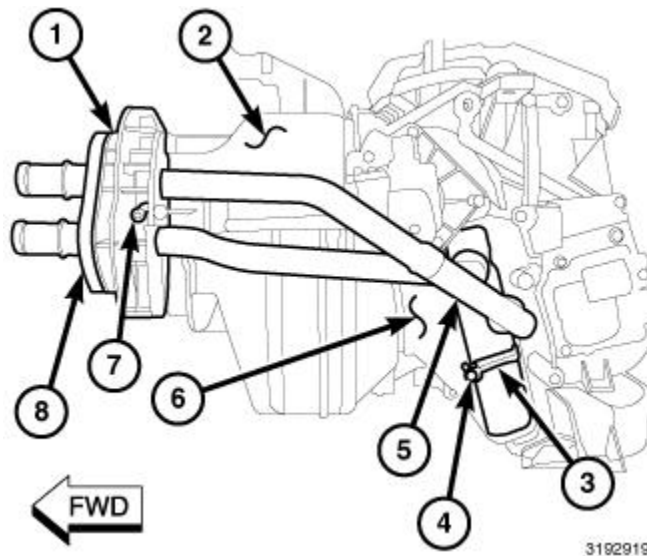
Screw, Flange, HVAC Housing, Retaining Screw, Bracket & Housing
